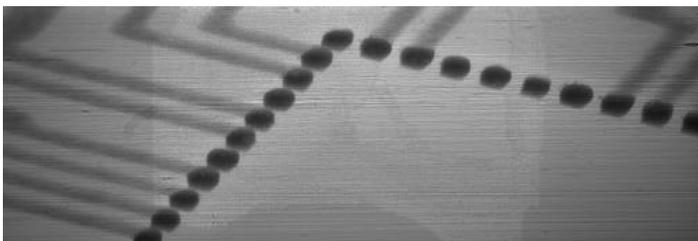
Raw radiograph of an electronic device which is flip-chip bonded to the printed circuit board.
